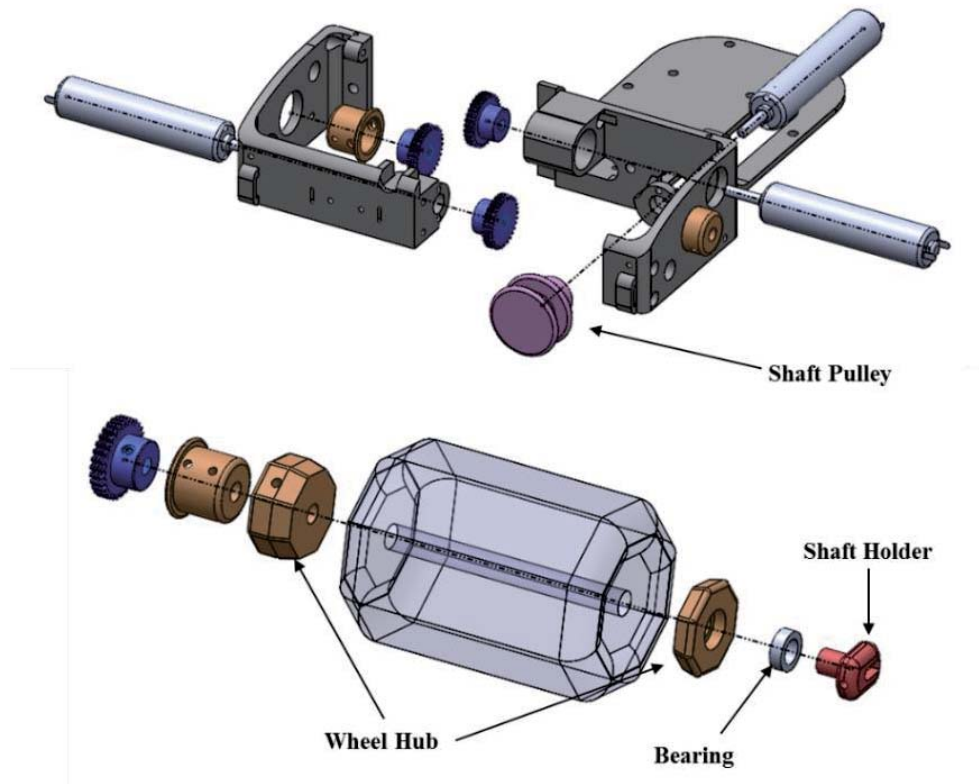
Assembly view and components of the wheel deformation mechanism.
